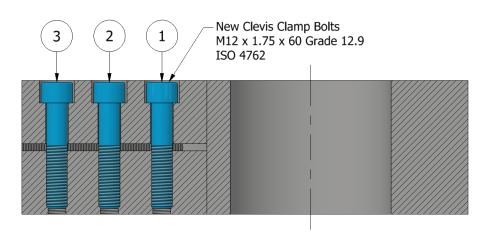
Clevis section view diagram showing the clamp bolts numbered sequence.
